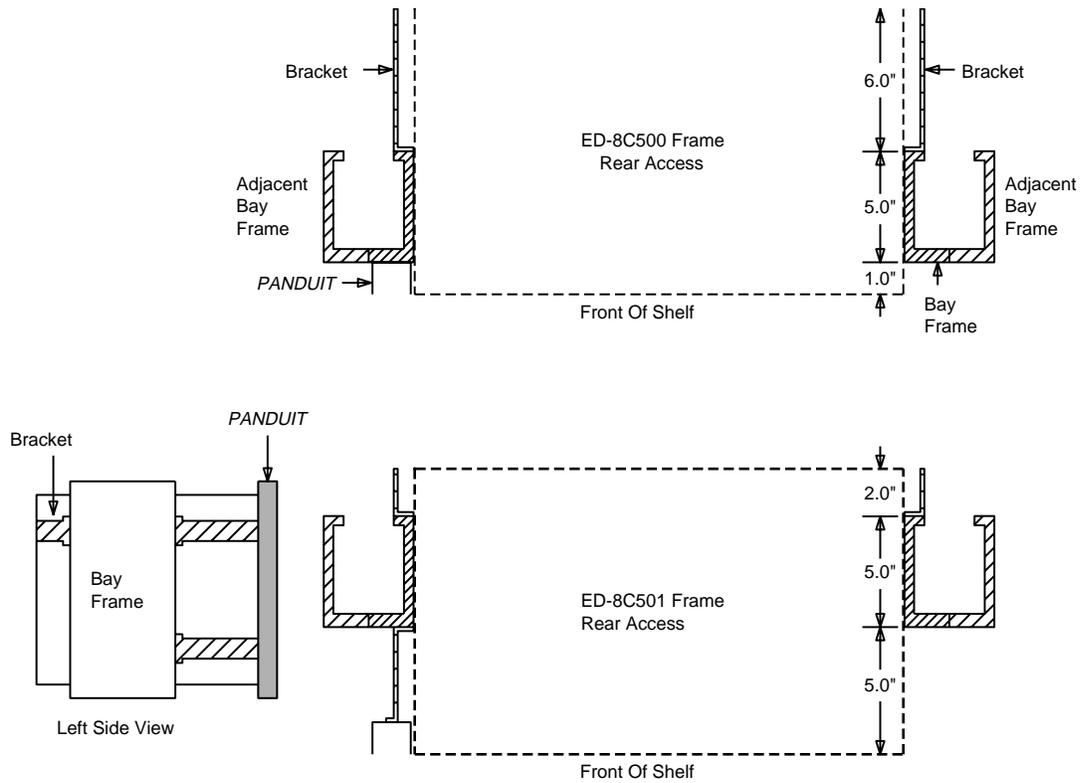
ED-8C501 Frame, Rear Access Cable Placement
